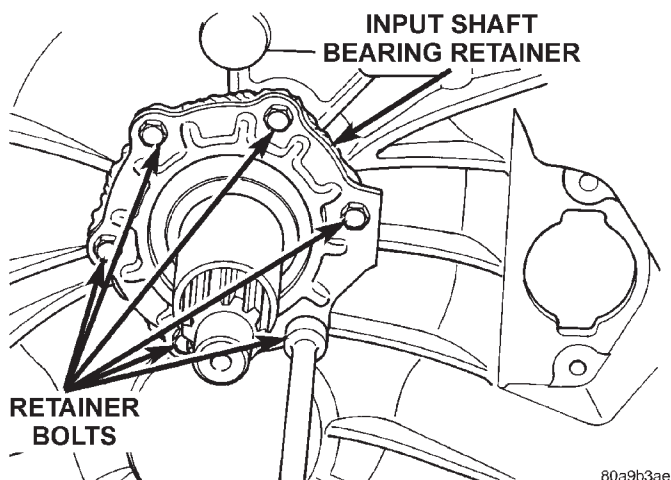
Input Shaft Bearing Retainer Bolt Removal
